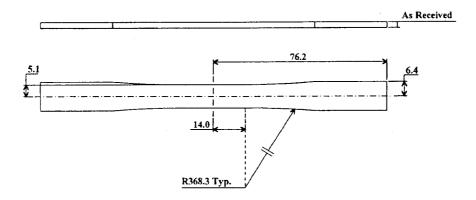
Geometry of the MI SiC/SiC Test Specimen Used in Tensile and Fatigue Tests. All the dimensions are in mm.
